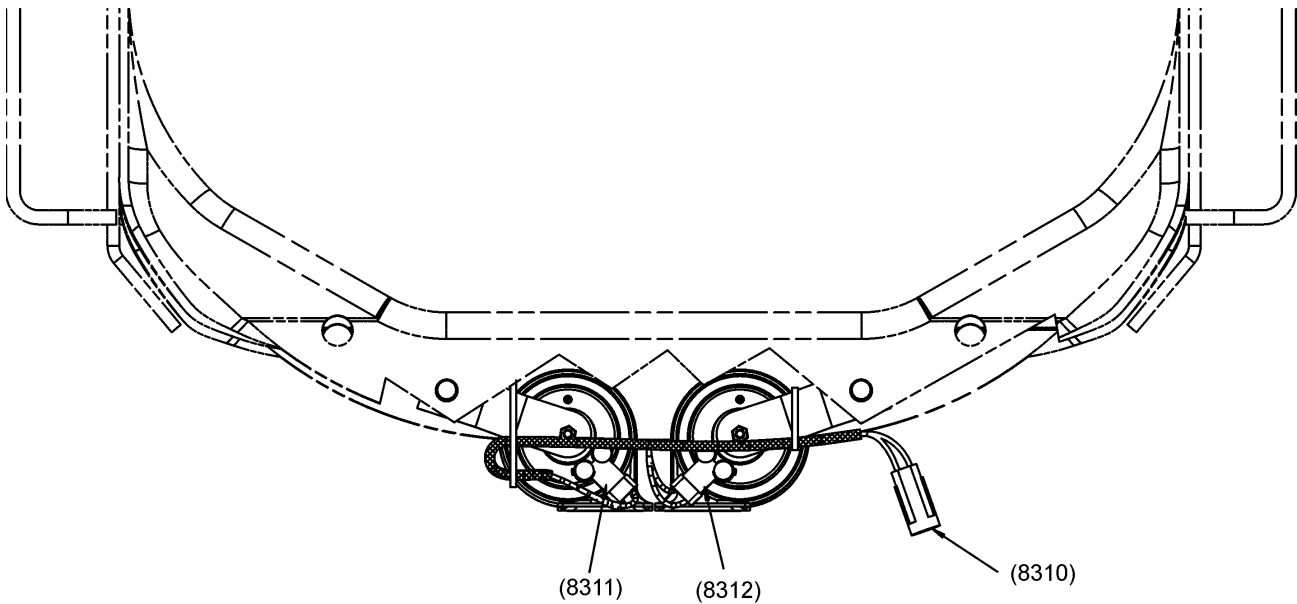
Electric Horn FWD Chassis Wiring Crossmember
